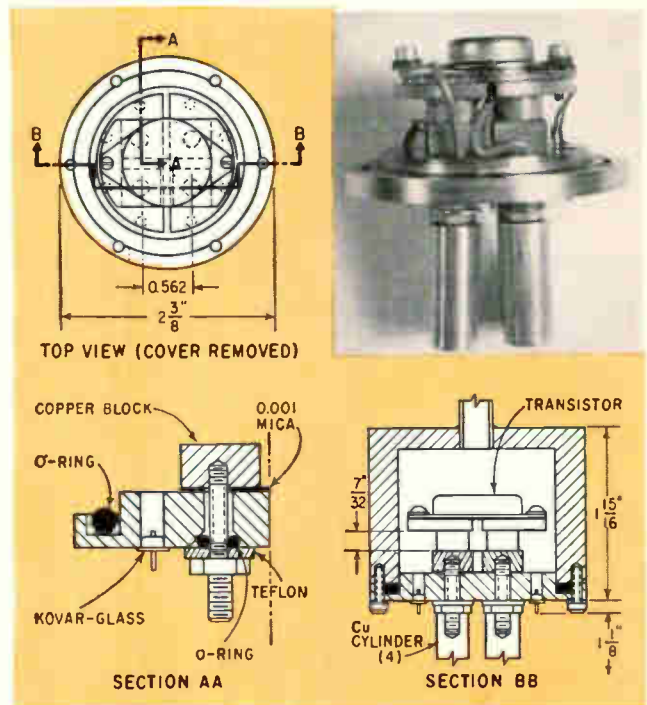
Cylinders at bottom of cooler assembly help remove heat from heat sink
